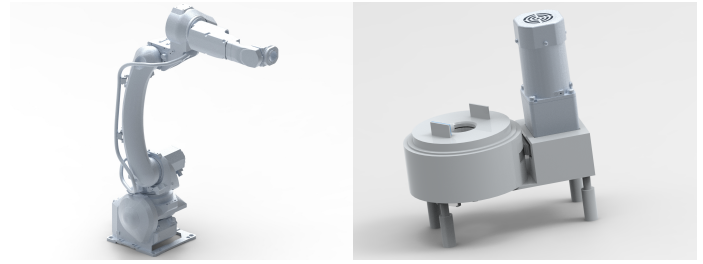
On The Left: Robotic Arm. On The Right: Preliminary Design Of Raptor.
